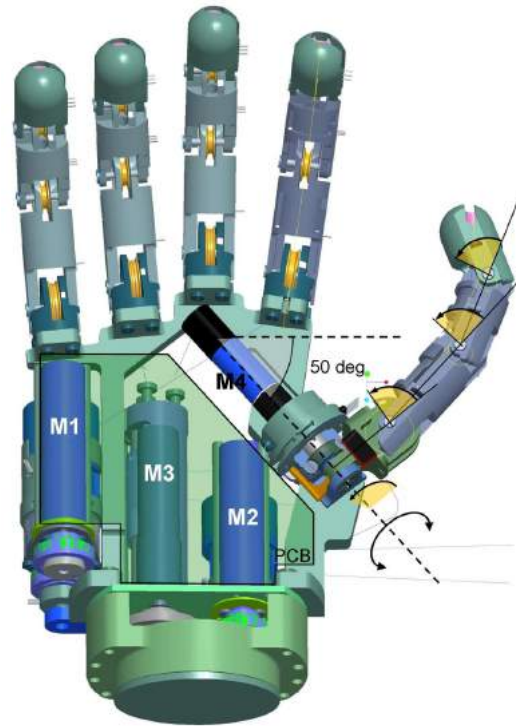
SMART hand CAD model showing how motors sit in the hand to pull fingers and thumb closed.
